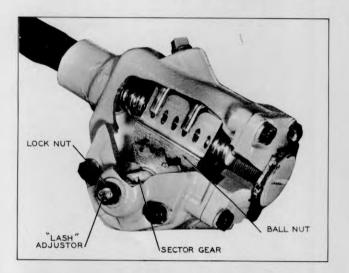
Steering Gear Lash Adjustment (Sector Gear)
